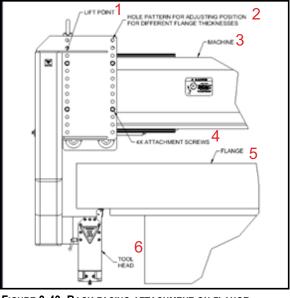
BACK FACING ATTACHMENT ON FLANGE
